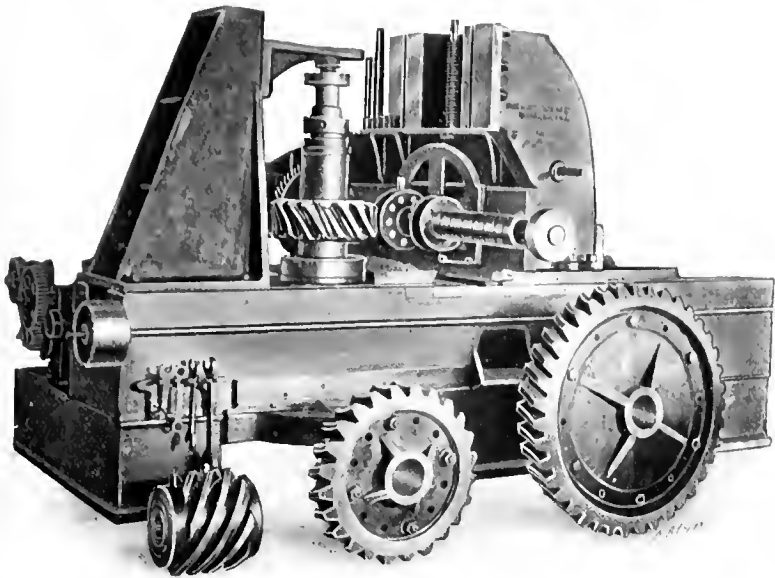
Eberhardt Bros. Fly-tool Worm-wheel-cutting Machine, with Samples of Work.
